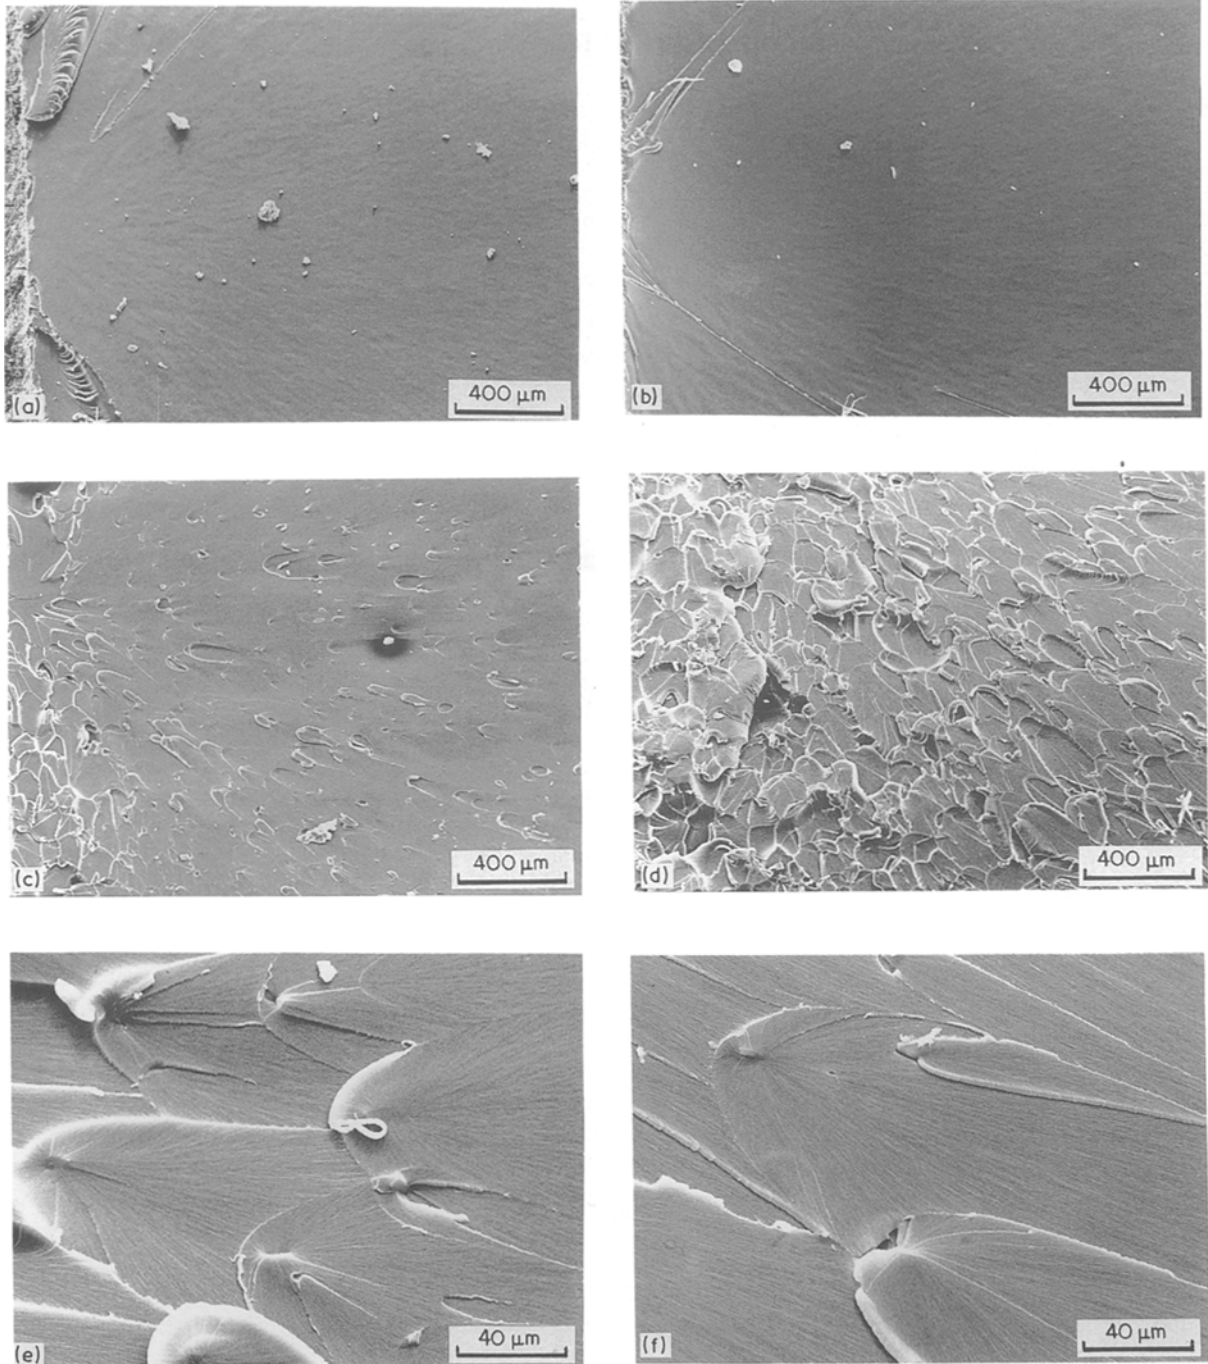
Fracture surfaces of blunt notch impact tested E and ER specimens: (a) E ($R = 0.3$ mm), (b) E ($R = 0.63$ mm), (c) ER ($R = 0.3$ mm), (d) ER ($R = 0.75$ mm); hyperbolic markings on fracture surfaces of ER (e) $R = 0.3$ mm and (f) $R = 0.75$ mm.
